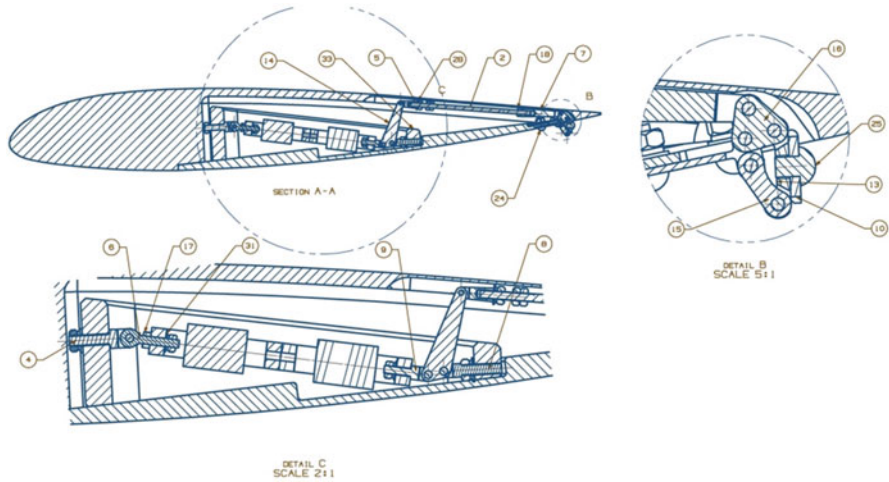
Blade section mock-up with active Gurney flap mechanism
